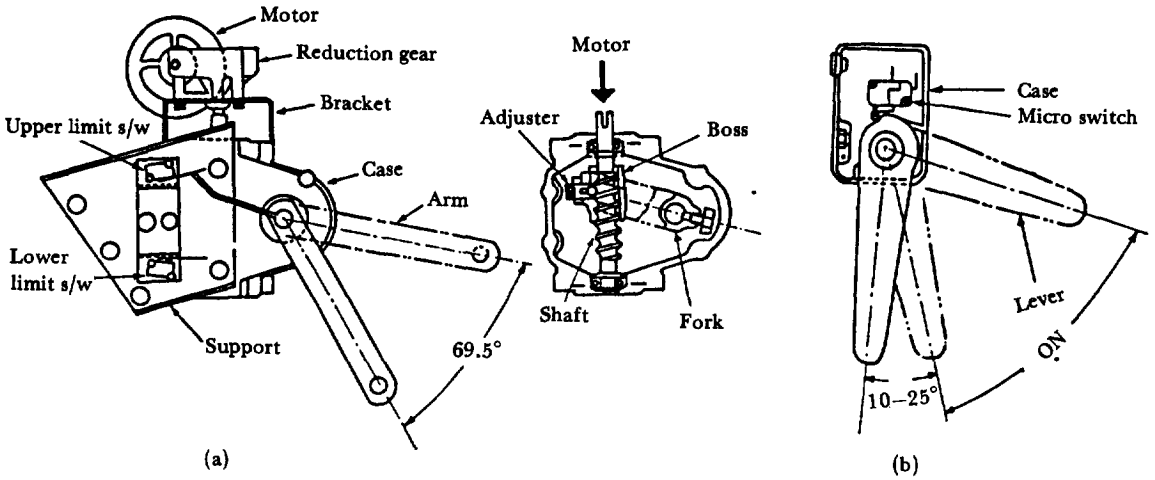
Rice stem positioning mechanism and sensor assembly.
